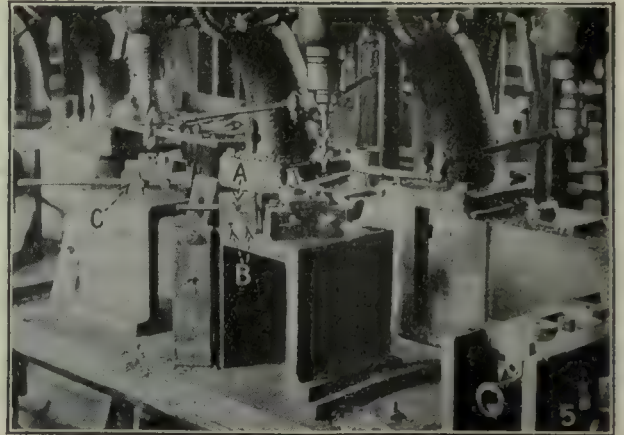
DRILLING CHASER BLANKS FOR ADJUSTABLE DIES
